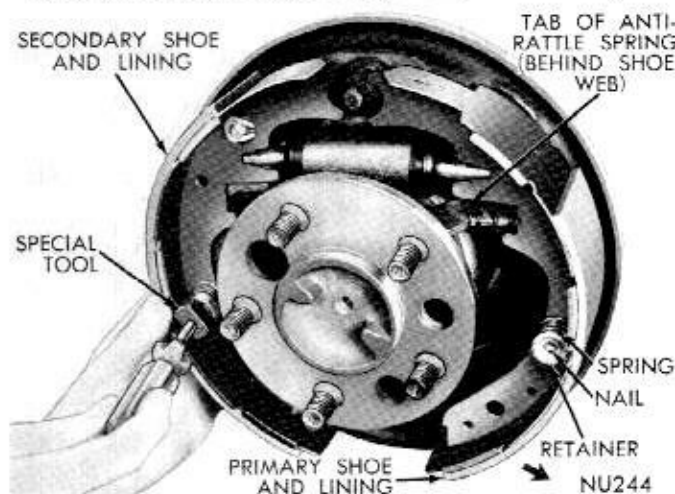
Removing or Installing Shoe Retainers, Spring and Nails (Right Rear)
